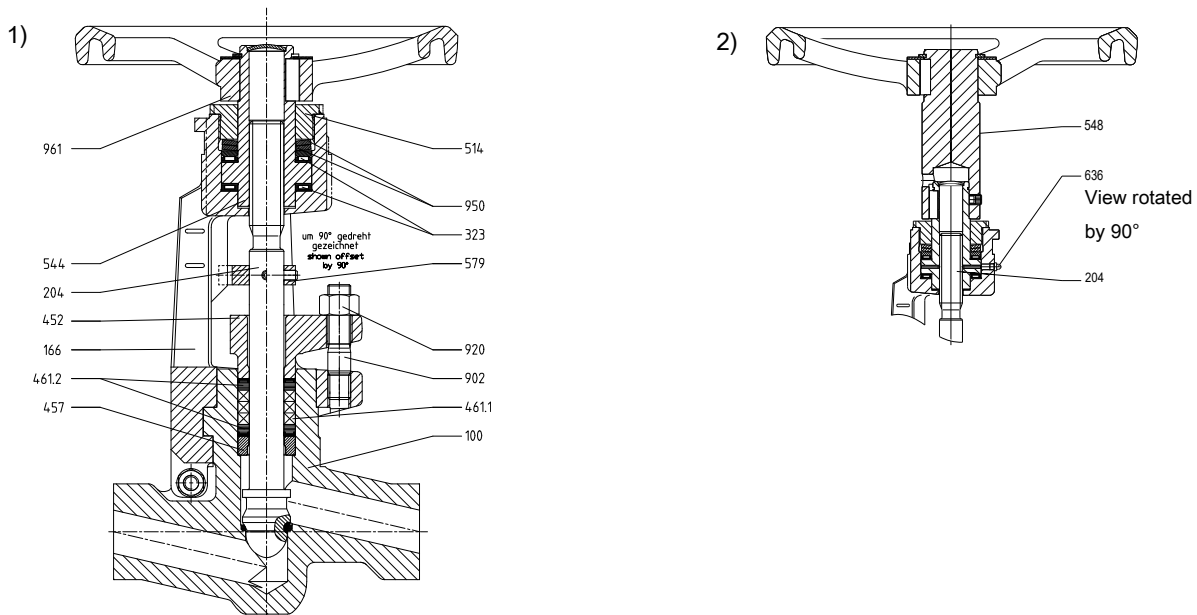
Sectional drawings; 1) ZXS 2) High-temperature designs
